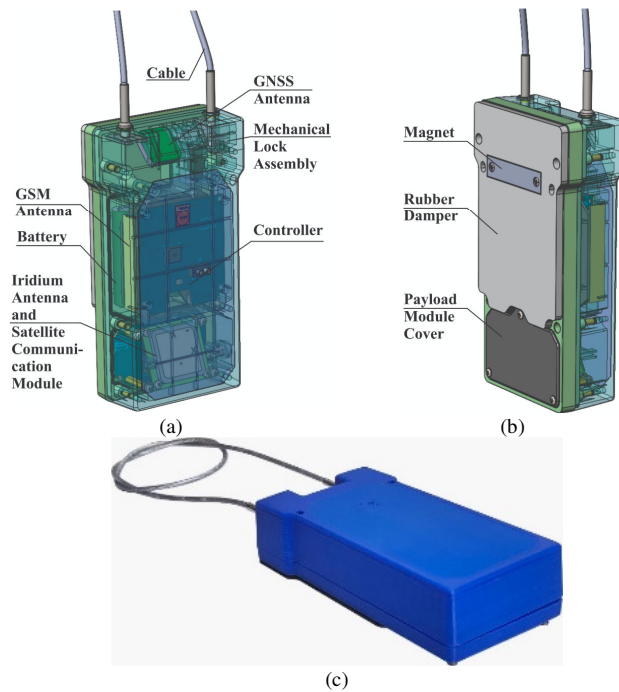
Layout of the navigation seal components and modules: (a) internal structure, (b) assembled configuration, and (c) 3D-printed prototype.
